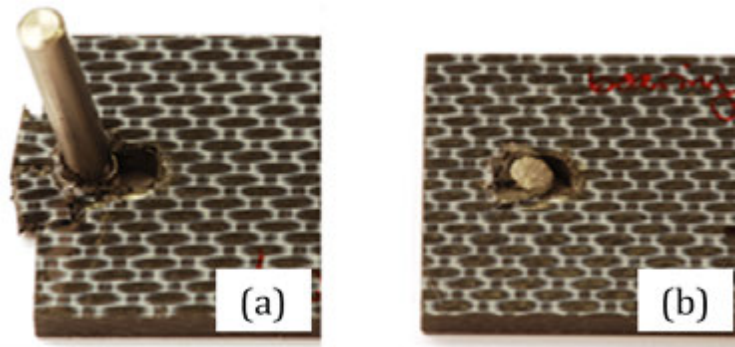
Example of bearing test specimens with  $w = 4d$  and failing in: (a) cleavage ( $e = 2d$ ); (b) bearing ( $e = 3d$ )
